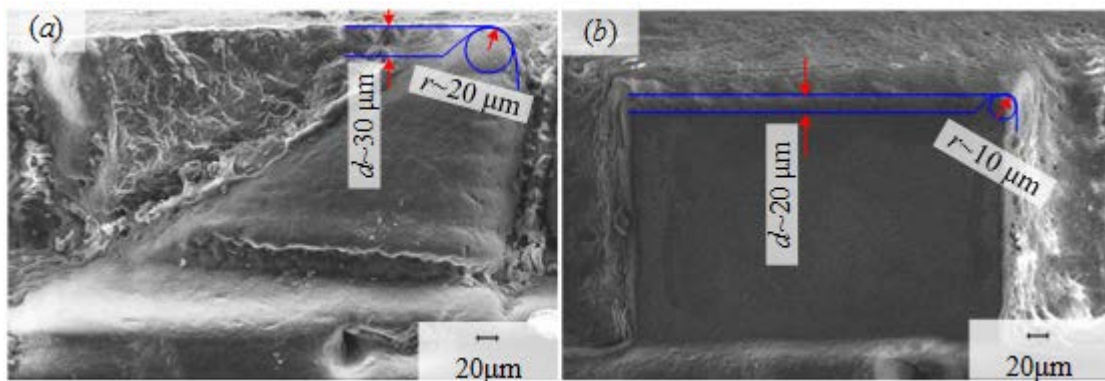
Cutting edge wear of grinding wheel (a) I, and (b) II
